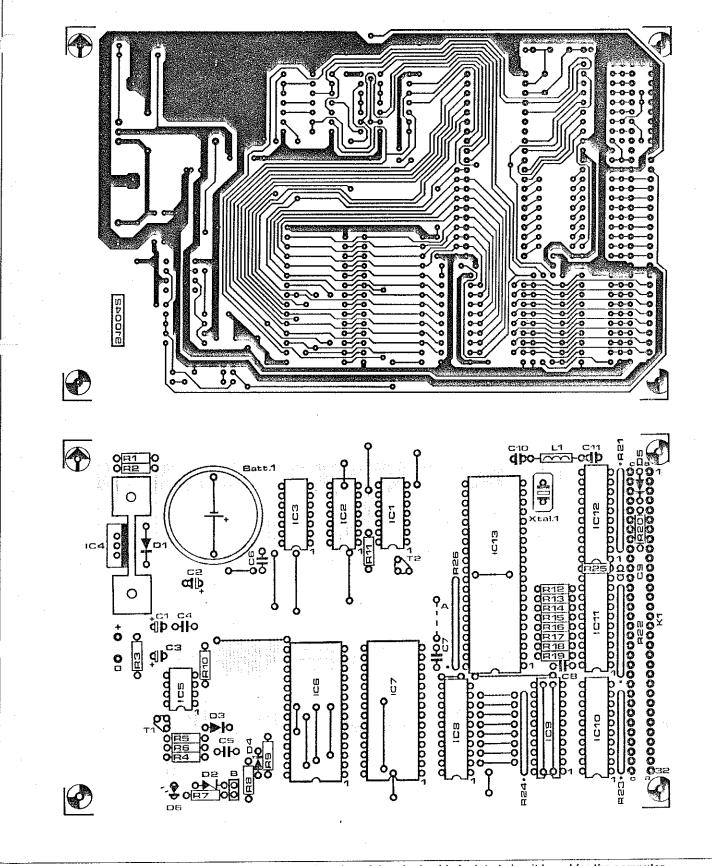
Track layout (mirror image) and component mounting plan of the single-sided printed circuit board for the computer.
